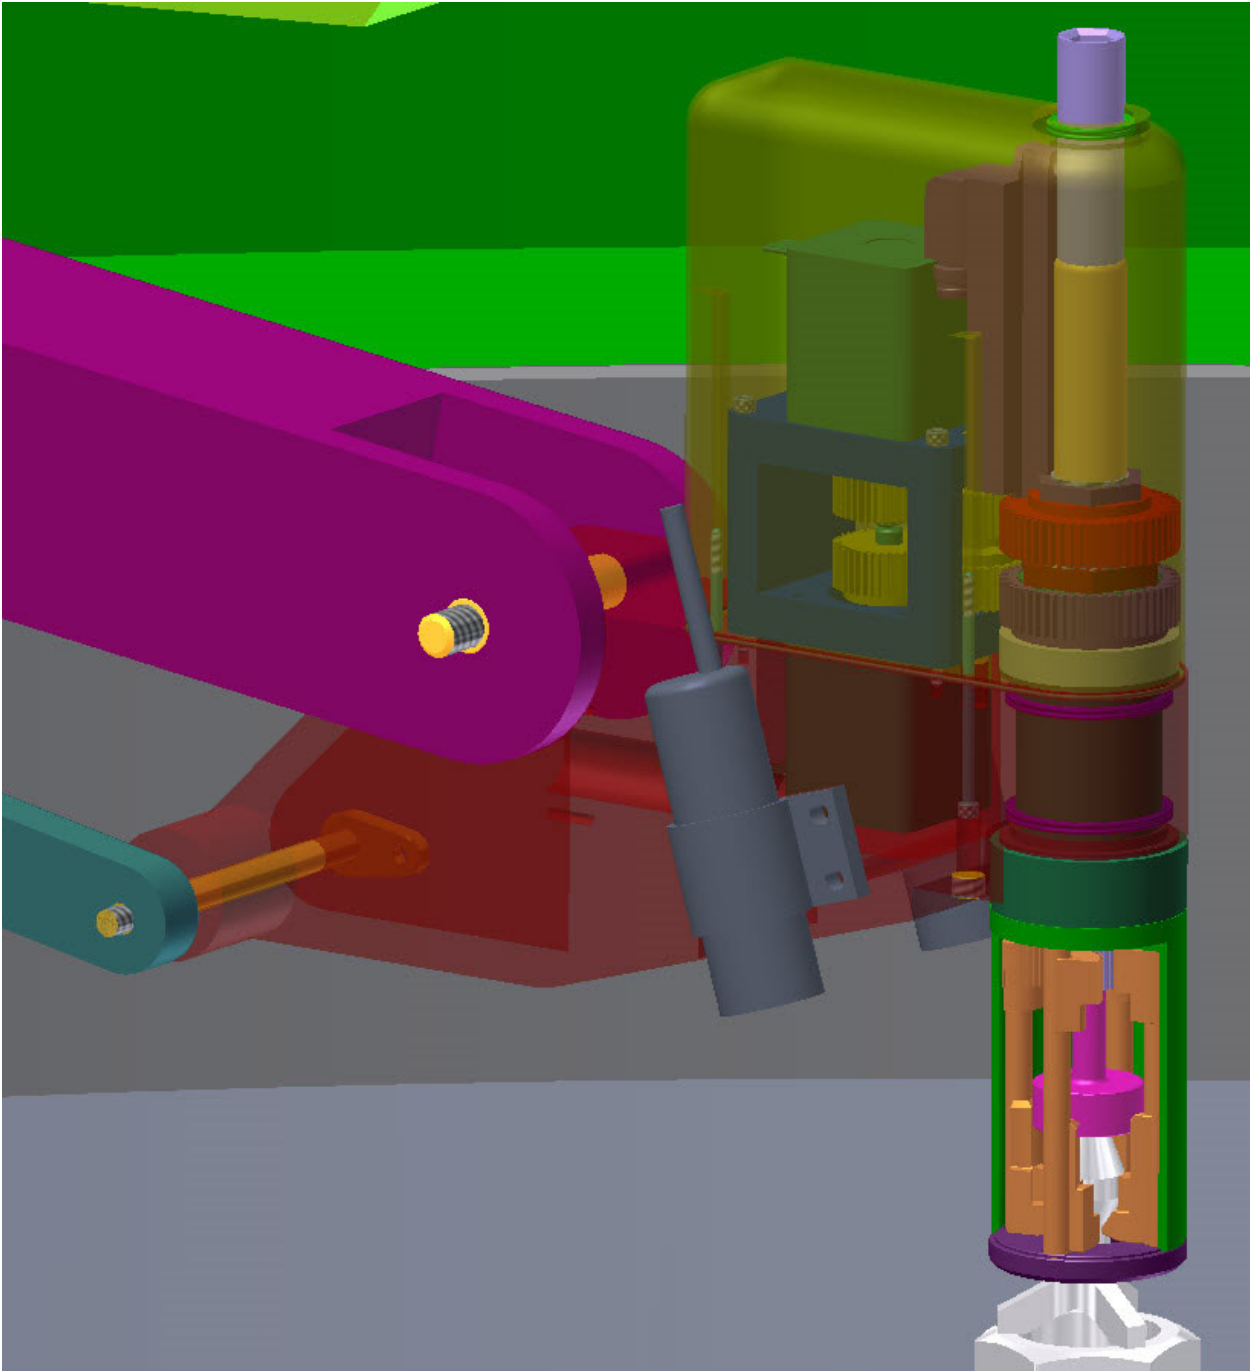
View of the fuel gripper showing the rotating jaws and the actuation motors.
